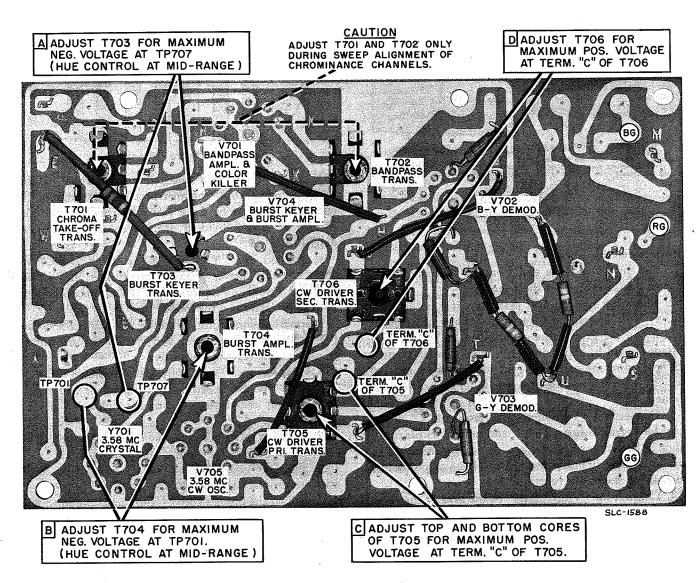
Test Points and Adjustments-AFPC Alignment CTC5-Bottom View Printed Circuit Board PW-700.
